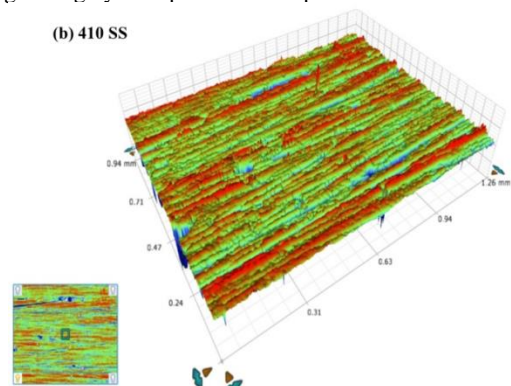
(b).3D pictures of the surface topography and surface roughness of 410 stainless steel sample obtained after emery paper grinding by 3D optical surface profilometer
